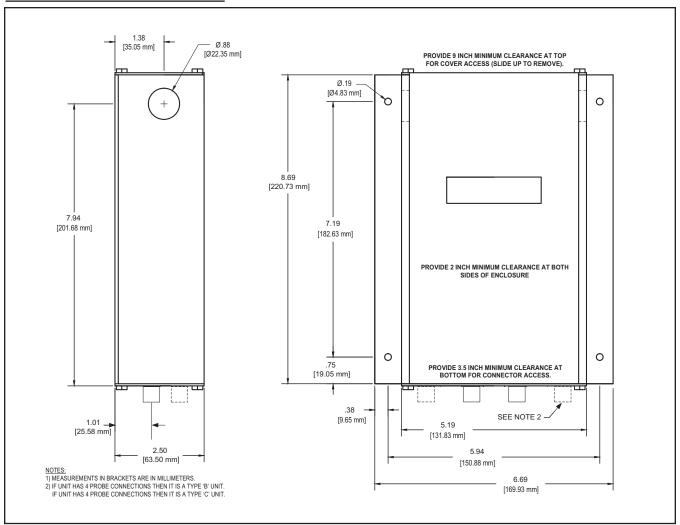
GTx108 Transmitter Mechanical Detail Drawing
